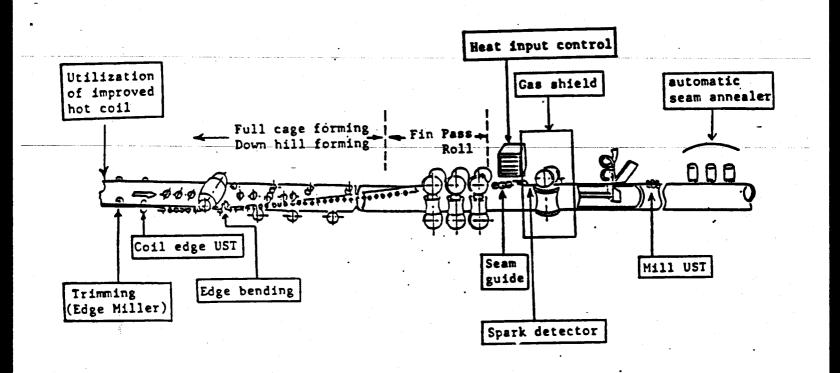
Schematic Representation of the Electric Resistence Welding (ERW) Process
